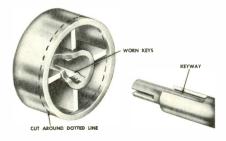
Worn Knob with Dotted Line Marking the Flange Cut.
